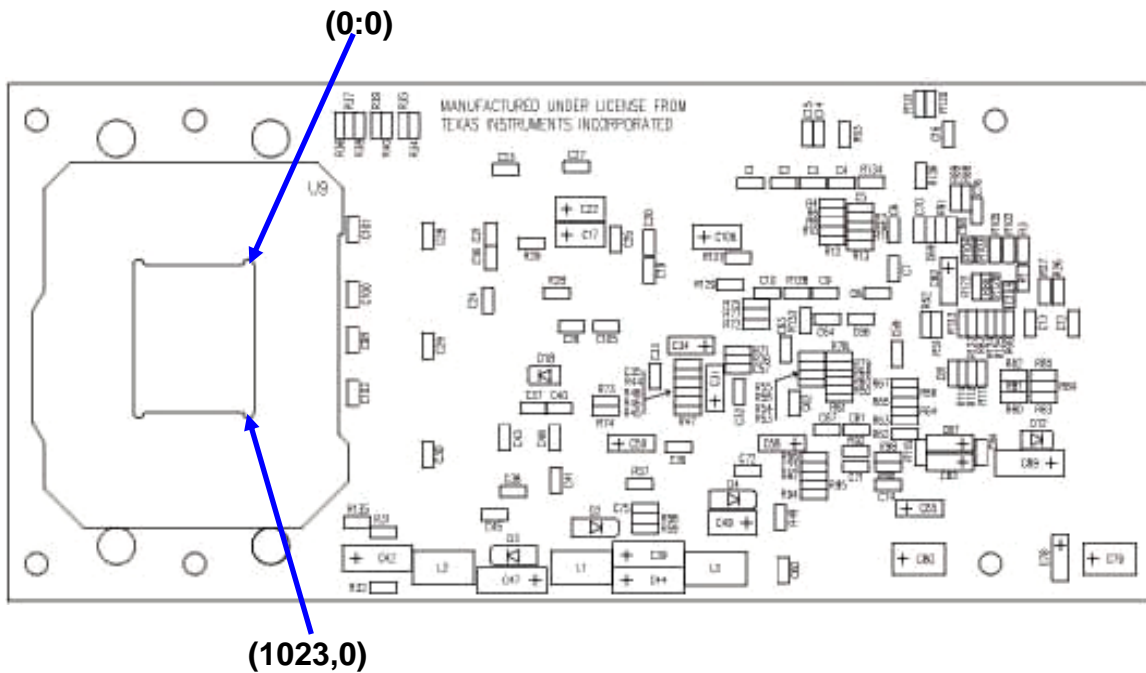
Discovery Controller Board Silkscreen, Bottom View
